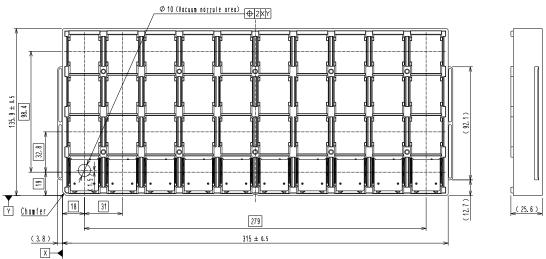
Hard Tray for IT9 Plug (dimensions in mm)
